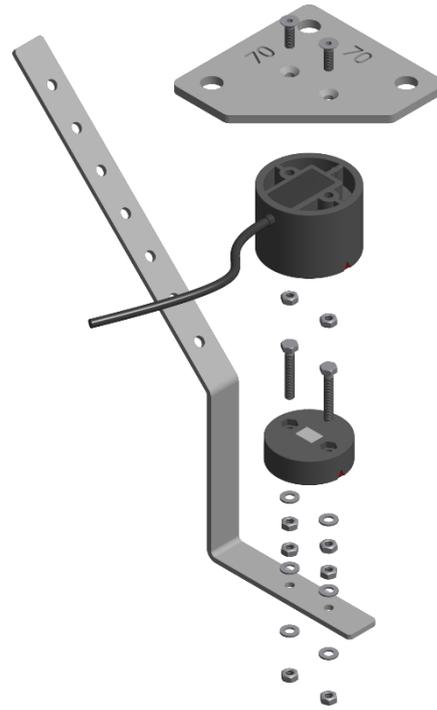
SCHEMATIC OVERVIEW OF WHEEL ANGLE SENSOR WITH MOUNTING BRACKET AND STRIP
